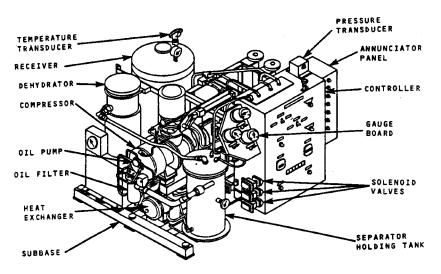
Oil-Free Rotary Helical Screw Compressor
